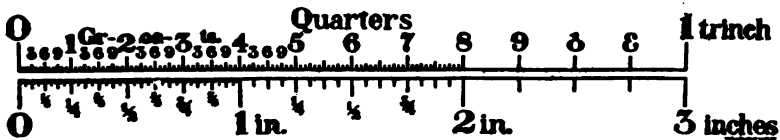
THE STANDARD 3-INCH STEEL SHOP-SCALE UNDER THE NEW SYSTEM.
